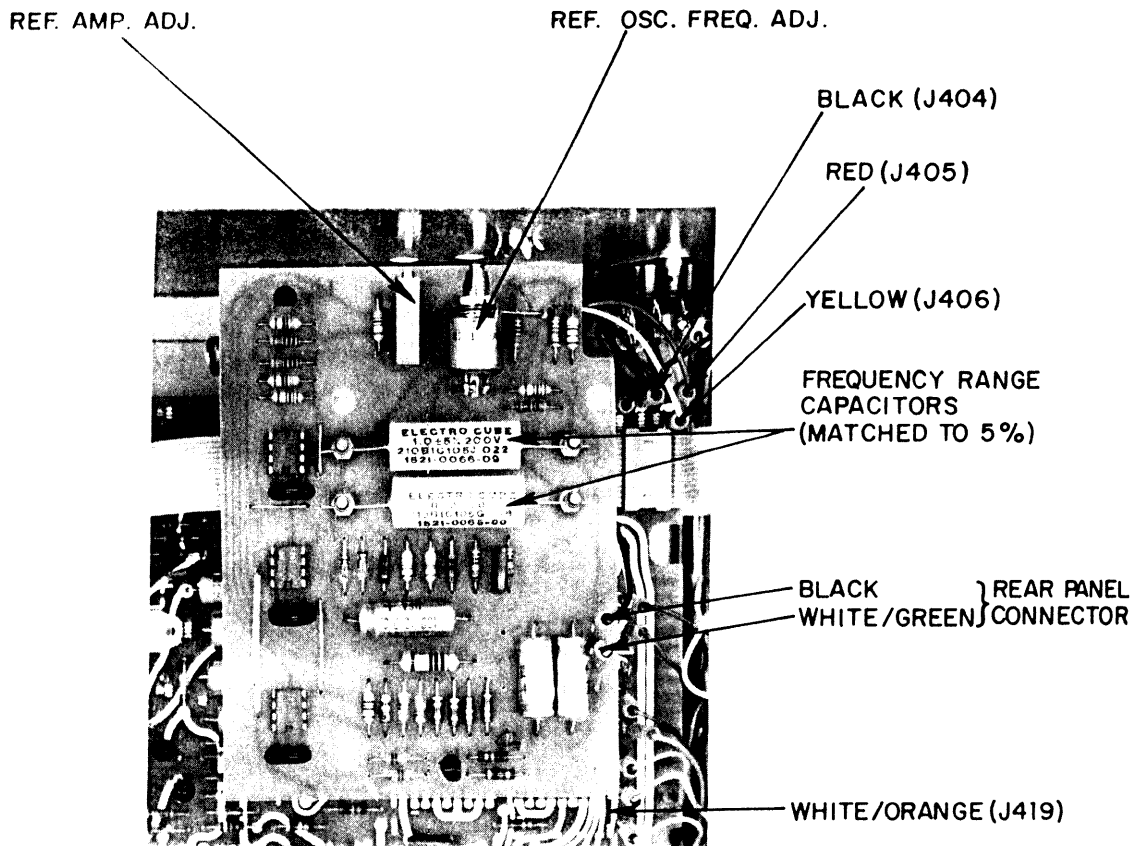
INTERNAL OSCILLATOR BOARD INSTALLED
